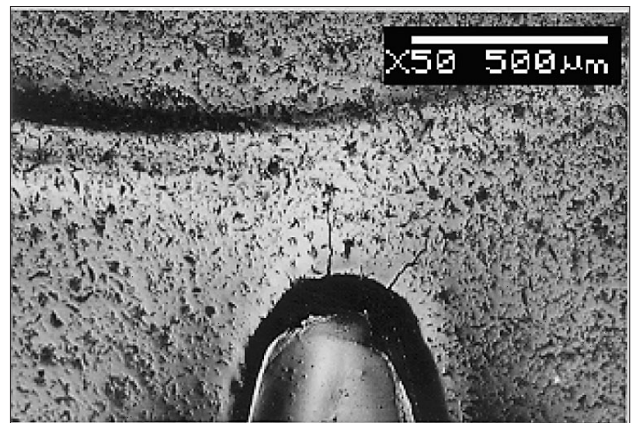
Working surface of the testing die-casting die. Surface pits and cracks at identification marks. OM
